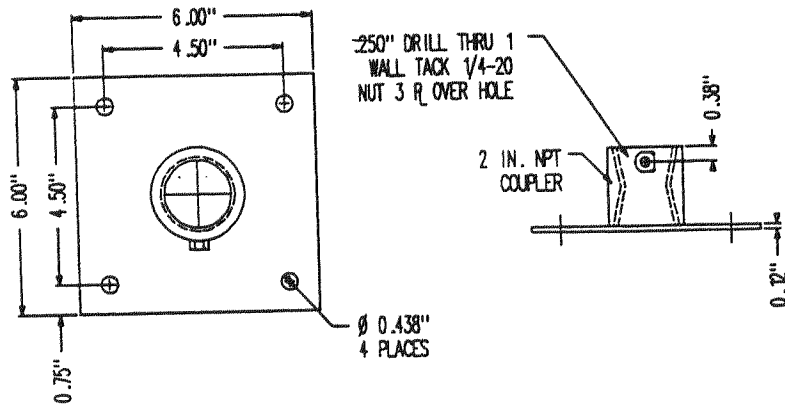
AMPRO 3300 CEILING MOUNT DIMENSIONS.
